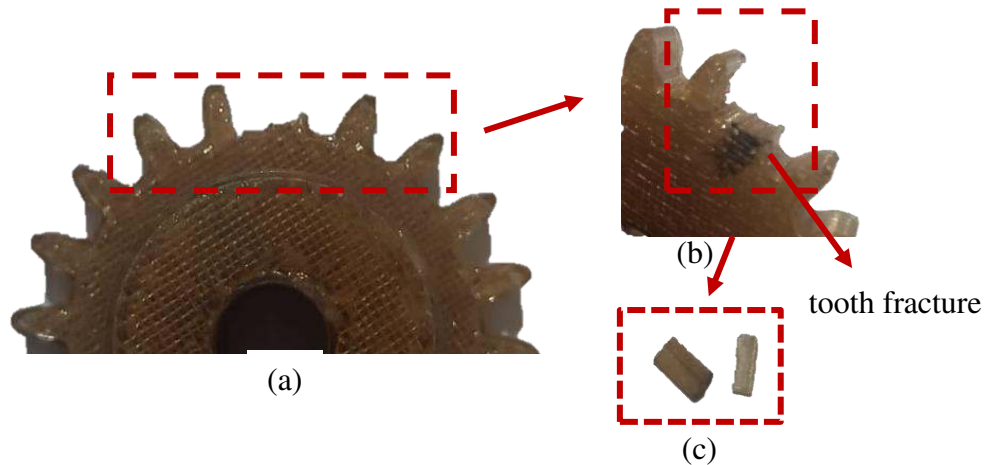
(a) Ultem 1010 gear at 800 rpm - 10.17 Nm torque, (b) Gear damage, breakage, (c) broken tooth fragments
